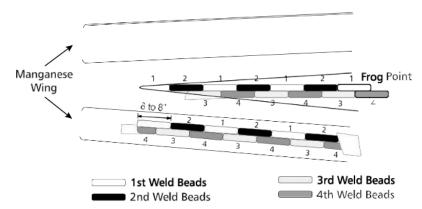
Example of Staggering Weld Beads in Point and Wing Build-up
